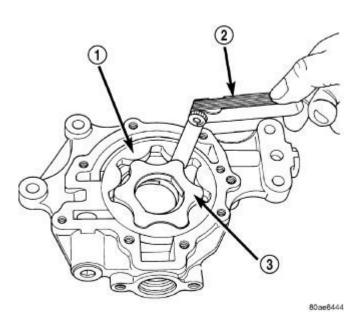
MEASURING CLEARANCE BETWEEN ROTORS Courtesy of CHRYSLER LLC
